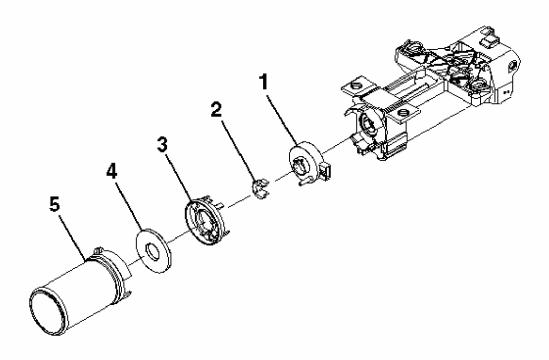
Identifying Lower Steering Column Components Courtesy of GENERAL MOTORS CORP.
